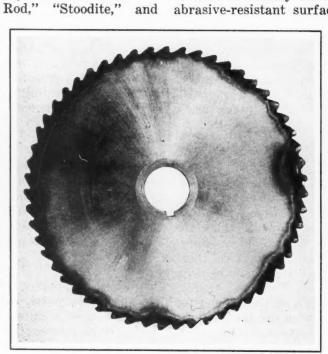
Saw for Cutting Marble, which has Hardfaced Cutting Surfaces
